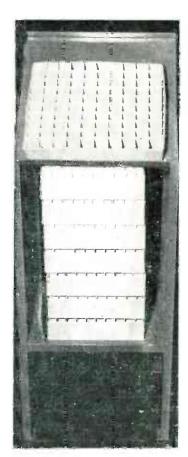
Universal welded-metal table for holding and storing cartons of small parts
